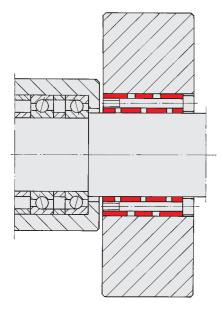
Flywheel fixture. On a high-speed rotating working spindle, the arrangement of the precisely concentric flywheel can help reduce the installed drive output.
